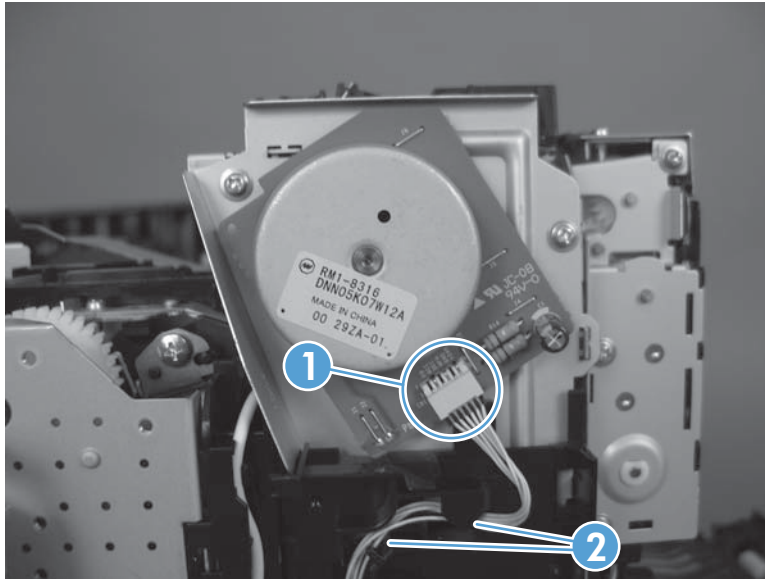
Remove the fuser-motor assembly (3 of 6)
